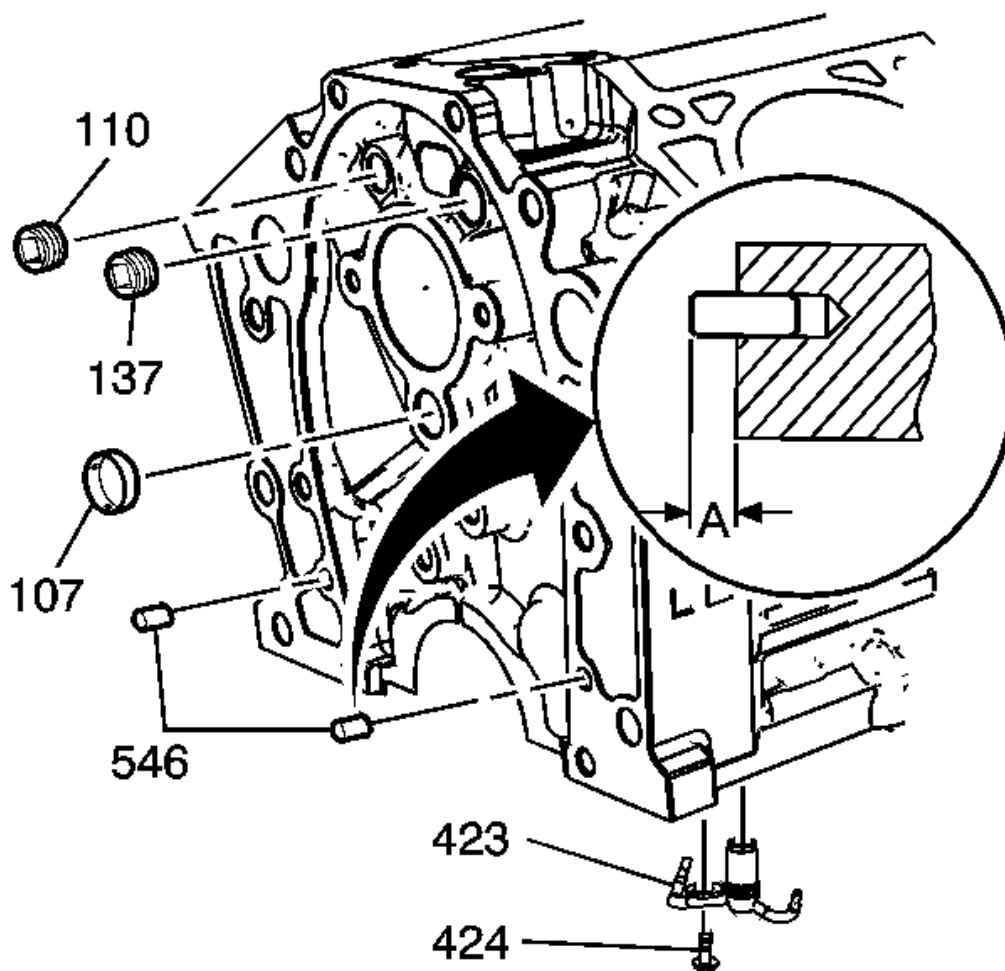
View Of Front Oil Gallery Plugs, Engine Front Cover Locating Pins & Piston Oil Nozzle
